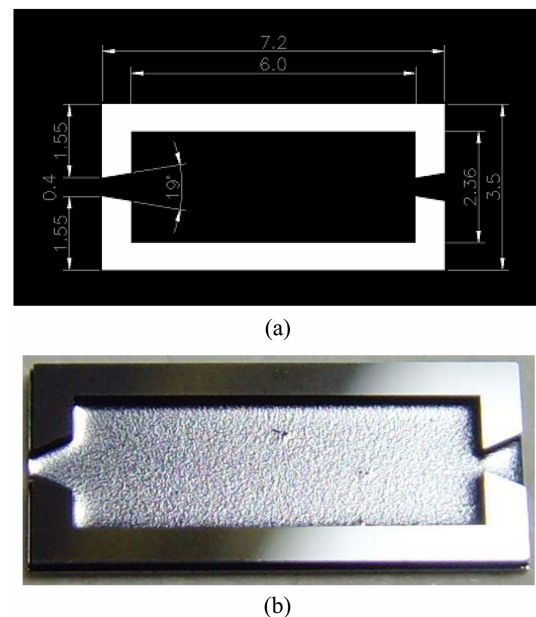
Design and fabrication of sensor system: (a) a layout of the integrated sensor system attachable with the micropump and (b) a photograph of the chip after post-processing.
